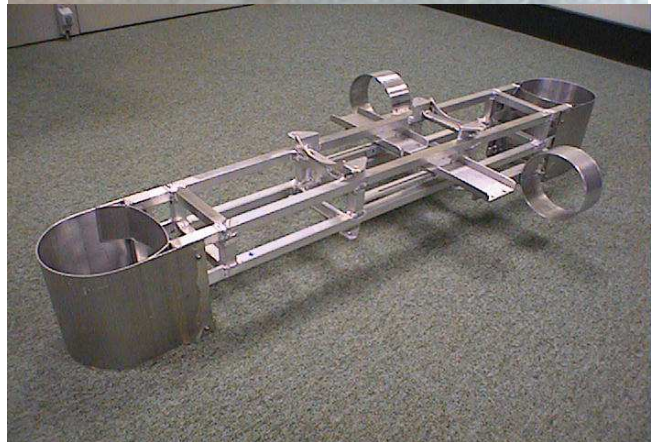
Skeletal Frame for two thrusters made from Aluminium.
